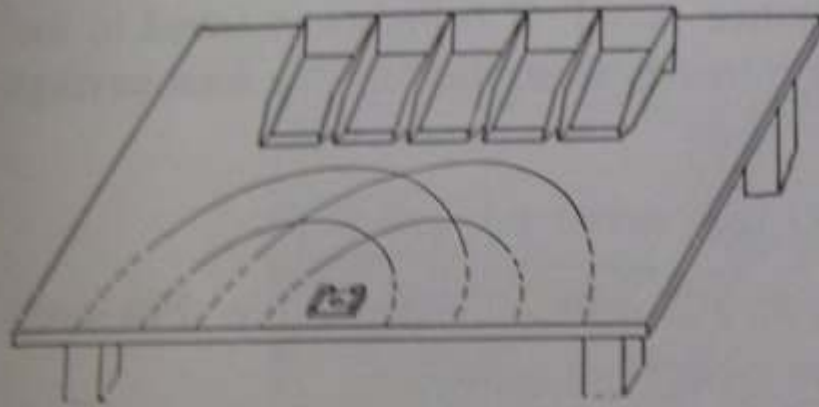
Incorrect work-place layout. Bins are located too far from the assembly fixture. The operator must bend forward to get the parts from bins.
